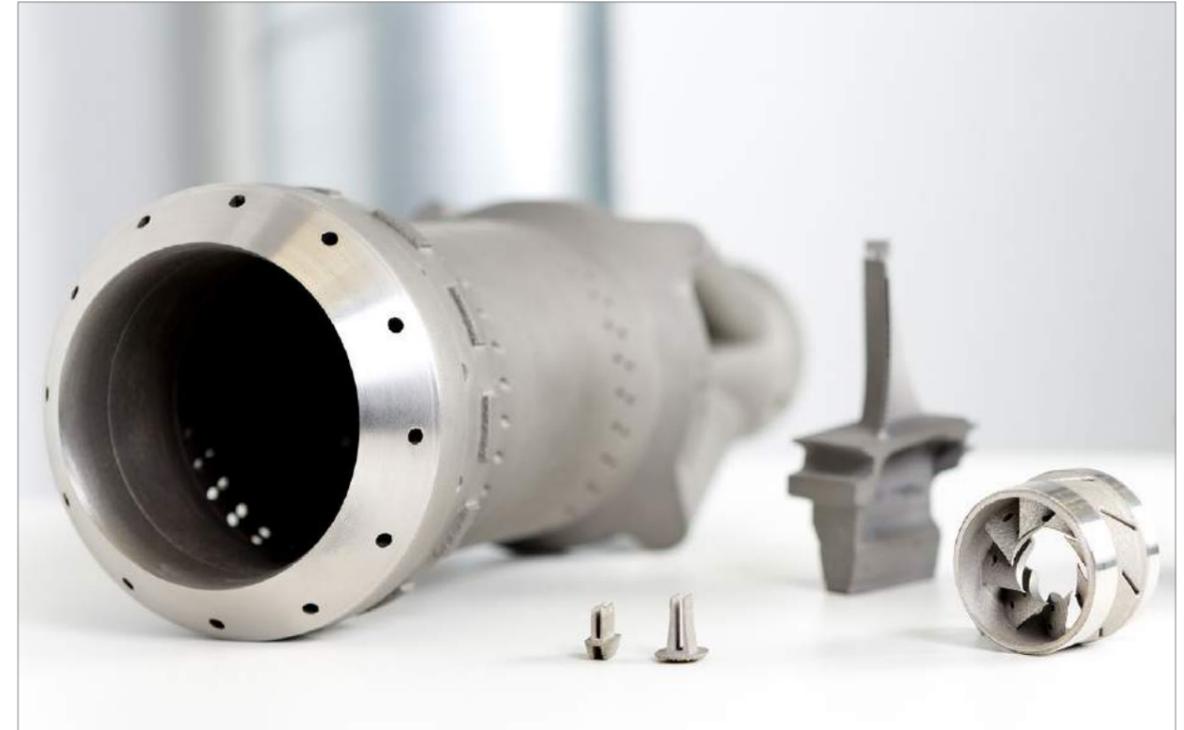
A selection of metal AM parts manufactured by Siemens, including the burner (left)
